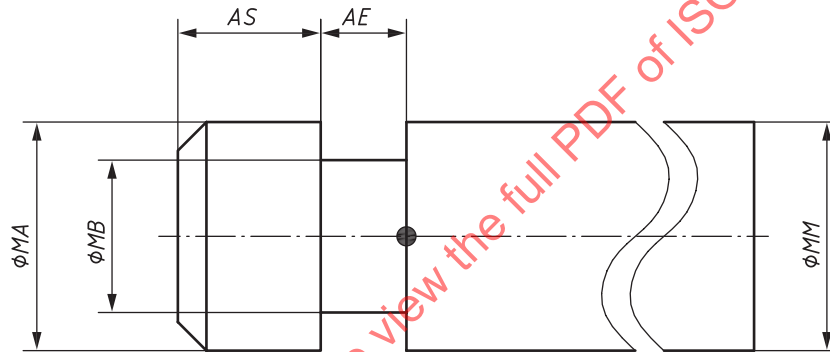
RFS_x — Grooved piston rod end with TRP at the shoulder level
